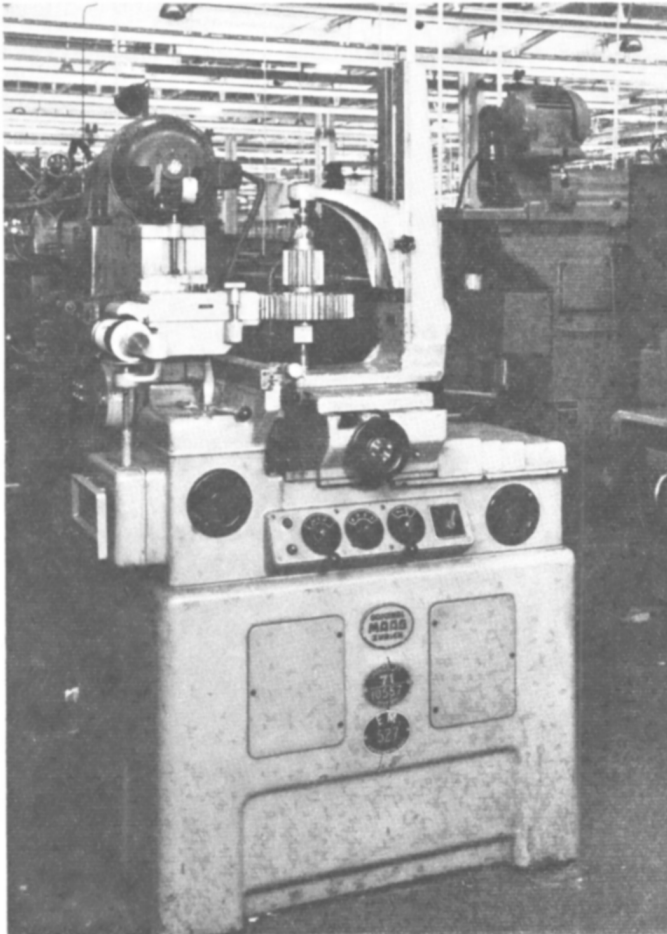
MAAG Gear Tooth Profile Checking Machine (Type P H 60)
